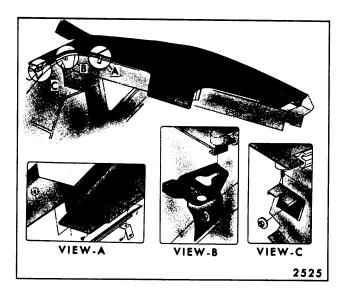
Compartment Shelf Trim Panel – Cad. "E" Styles
